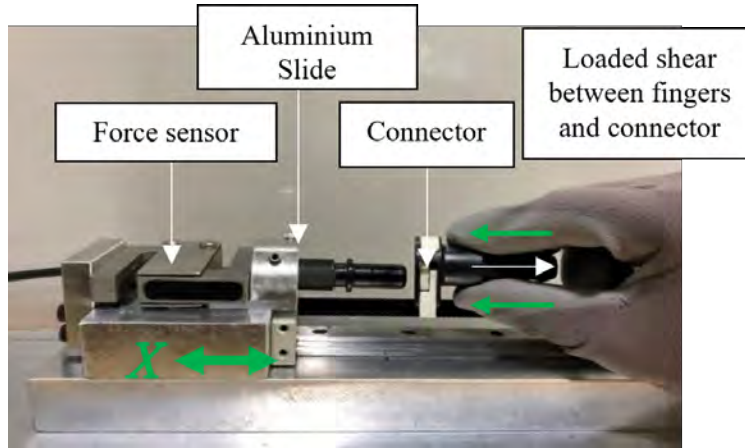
Finger engagement demonstrating the utilization of shear force in grip
